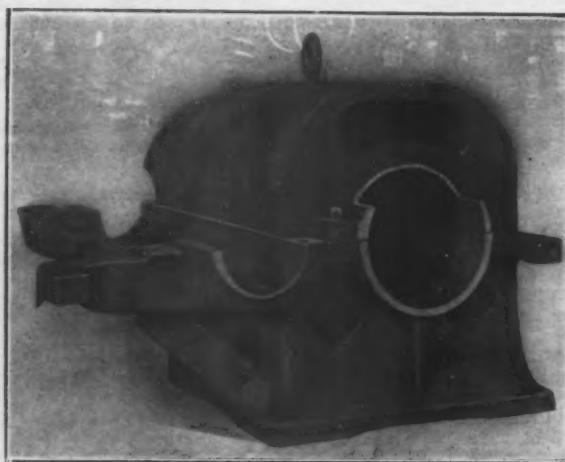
A Casting on Which a Bracket Support Was Welded.
